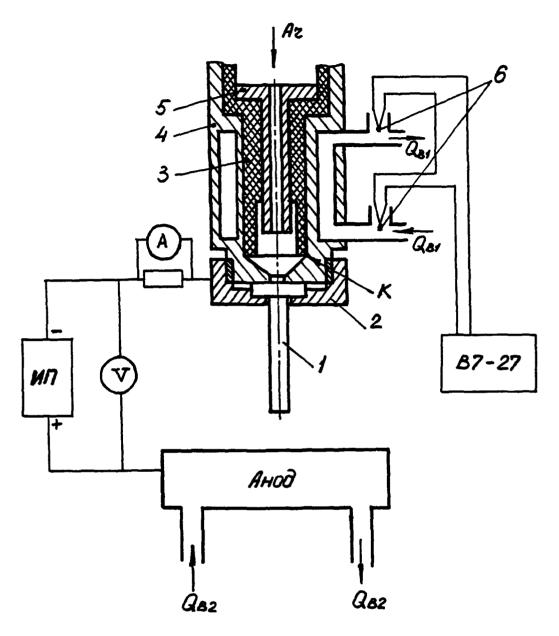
Hot hollow cathode welding scheme [66]
